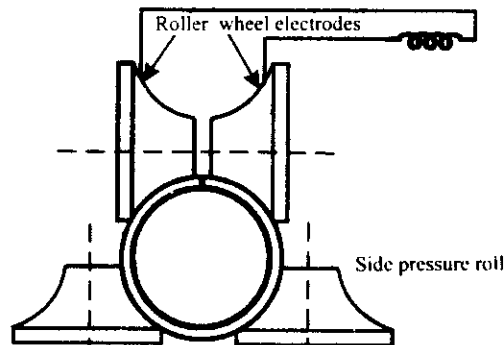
Electric resistance butt seam welding for pipe manufacturing.
